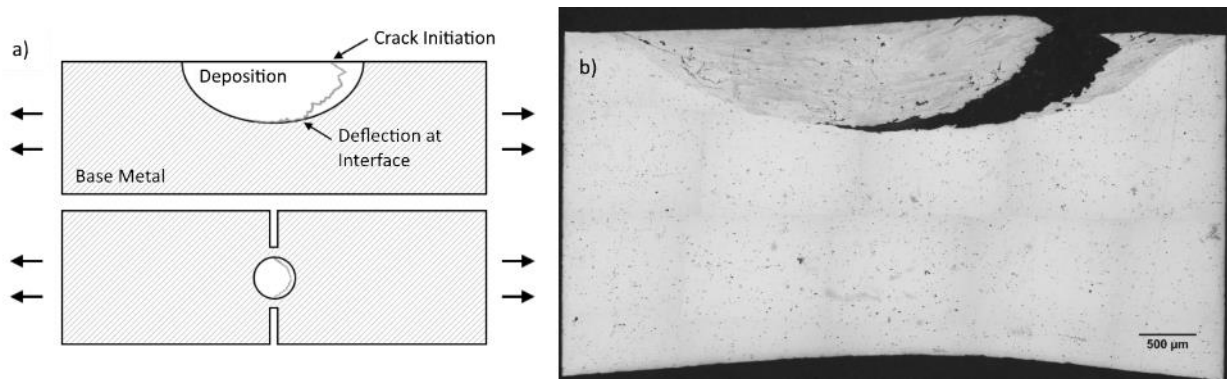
a) Side and top view schematic of crack location relative to deposition geometry and b) cross-sectional OM image of a lightly etched specimen tested until the initial fracture of the deposited material
